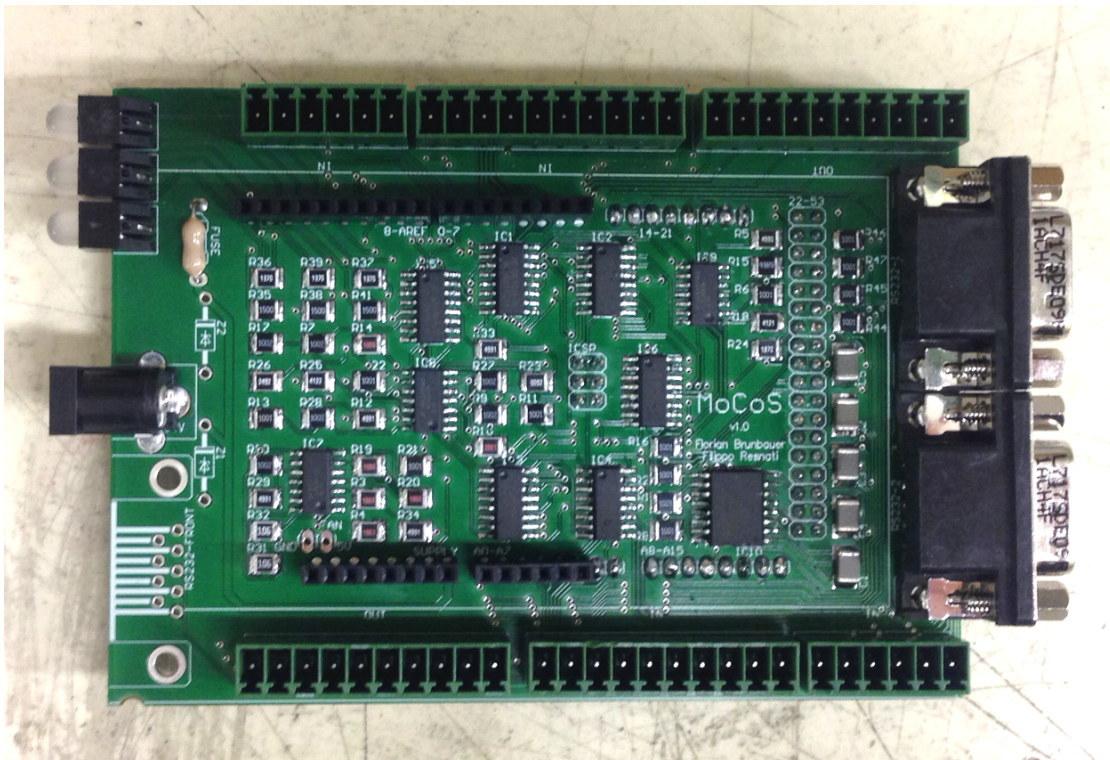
Assembled PCB: Signal conditioning board of the portable device with components and connector headers mounted.
